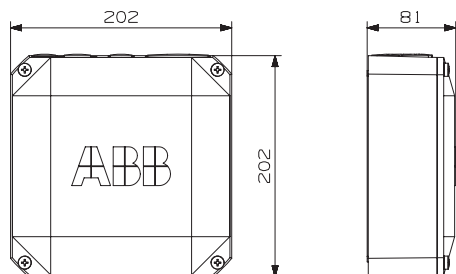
Motor sizes 100 - 132, standard design with 3 terminals
